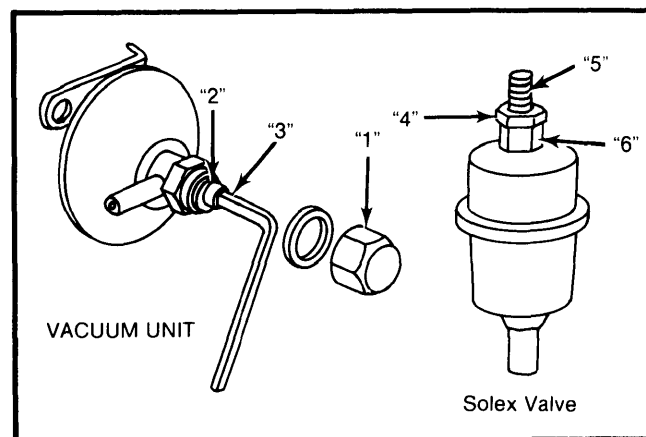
Adjusting Fast Idle at Deceleration Vacuum Unit and Valve
